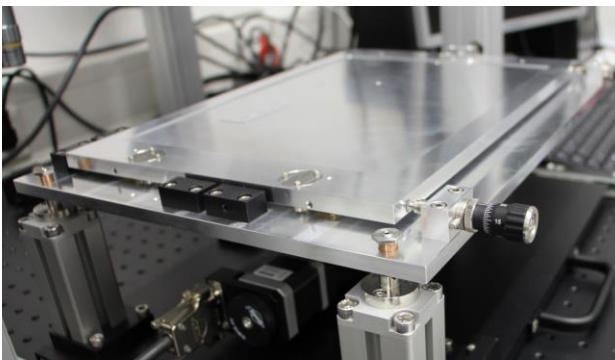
Alignment tool with integrated vacuum chuck and manually driven actuator screws for chuck positioning
